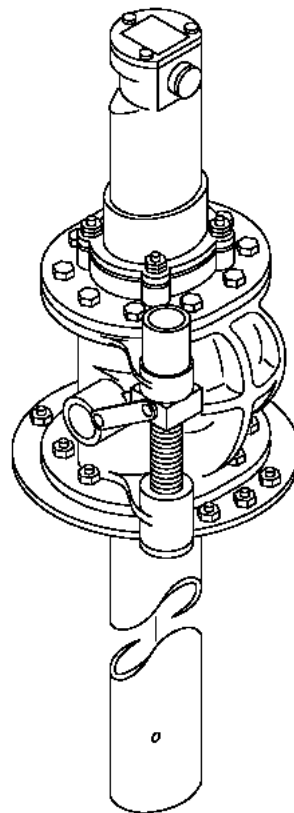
Retractable Rodmeter and Sea Valve Assembly
